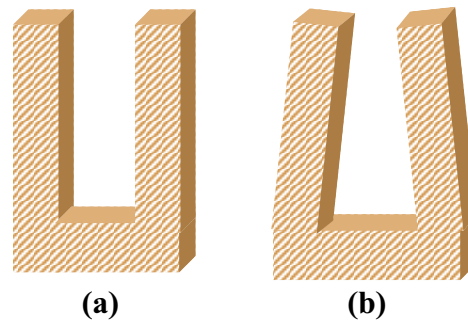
Prong test showing (a) acceptable piece of board and (b) unacceptable piece of board with excessive stress buildup.
